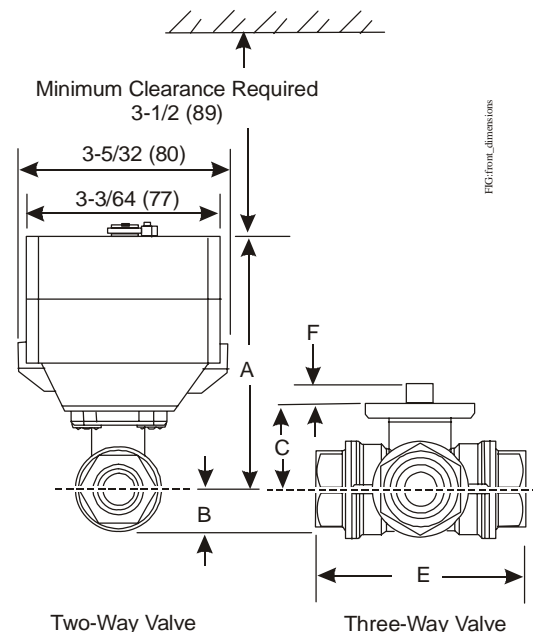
Dimensions of VG1241, VG1245, VG1841, and VG1845 Series Ball Valves with VA2202 actuators, in. (mm), Front View
